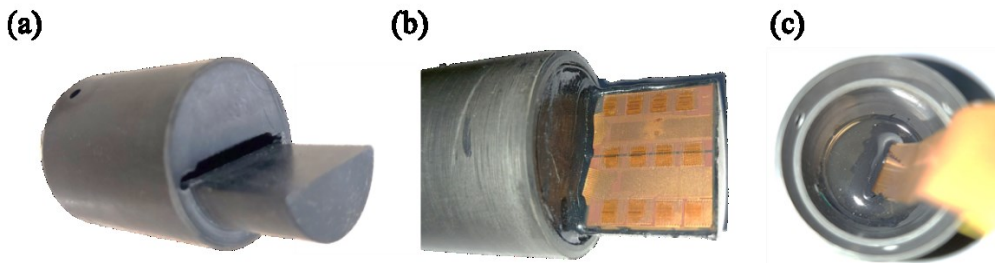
Sensor head assembly - LPCB. (a) Blank sensor head casing, (b) LPCB glued to the sensor head, and (c) Epoxy filled sensor head
